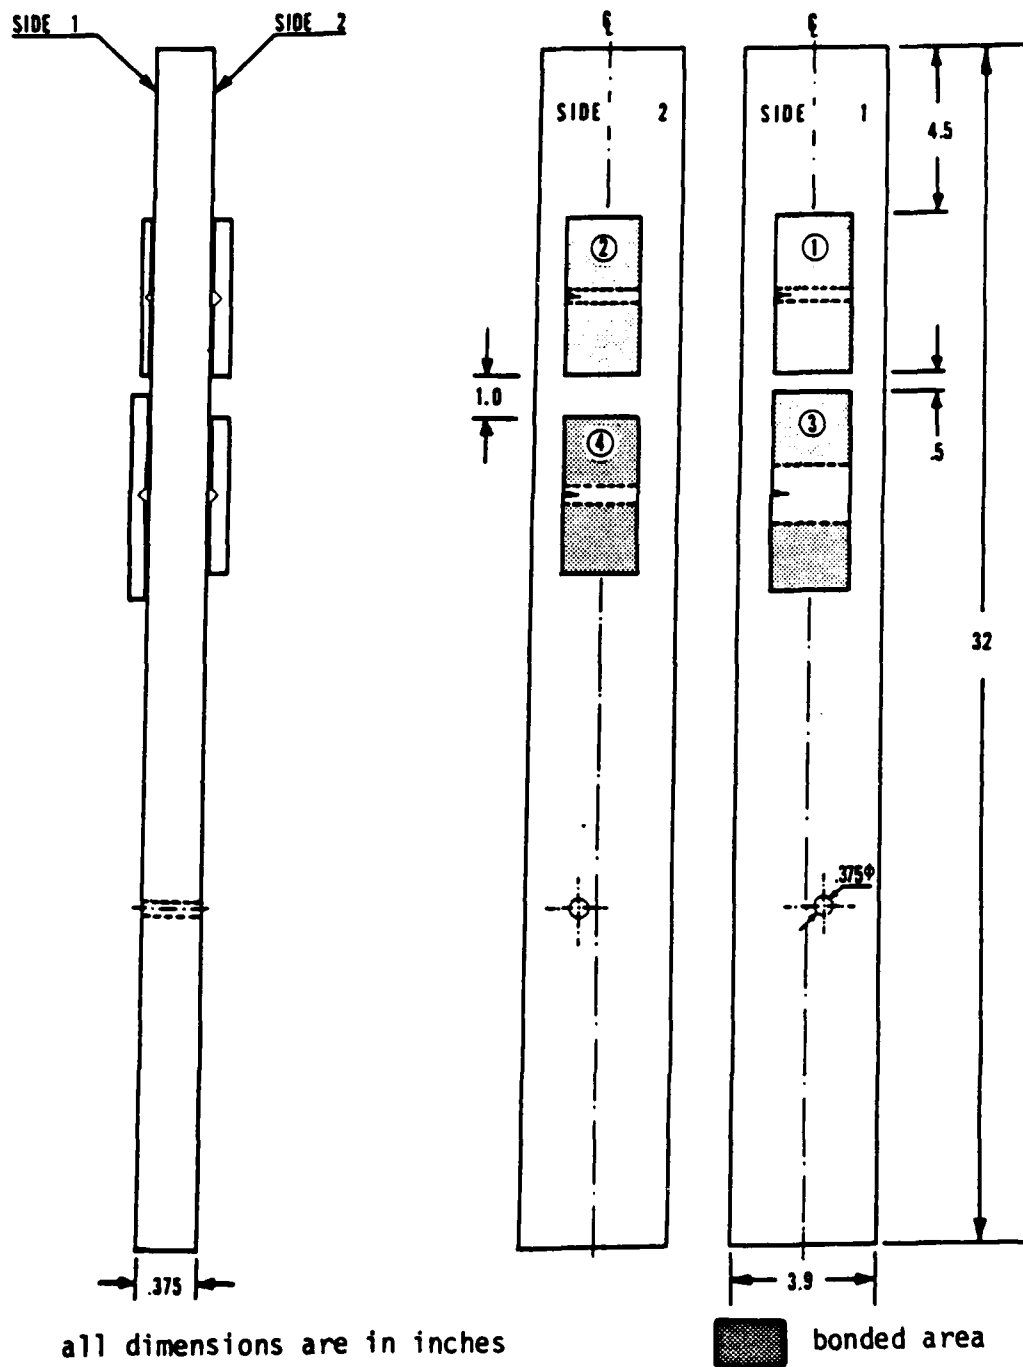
Large carrier specimen with four different single side-grooved crack gage configurations, typical of Tests 29 and 49.
